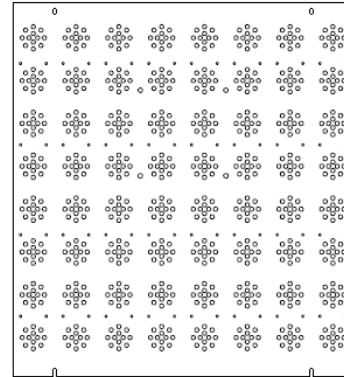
8x48-64mm TNMC Cabinet with Modules Removed
